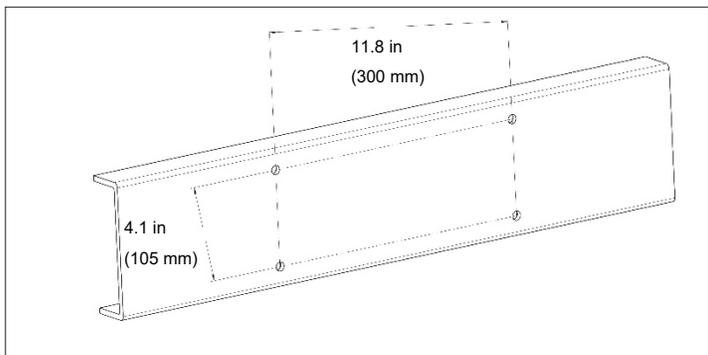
Mounting Hole Dimensions – Enclosure Box
